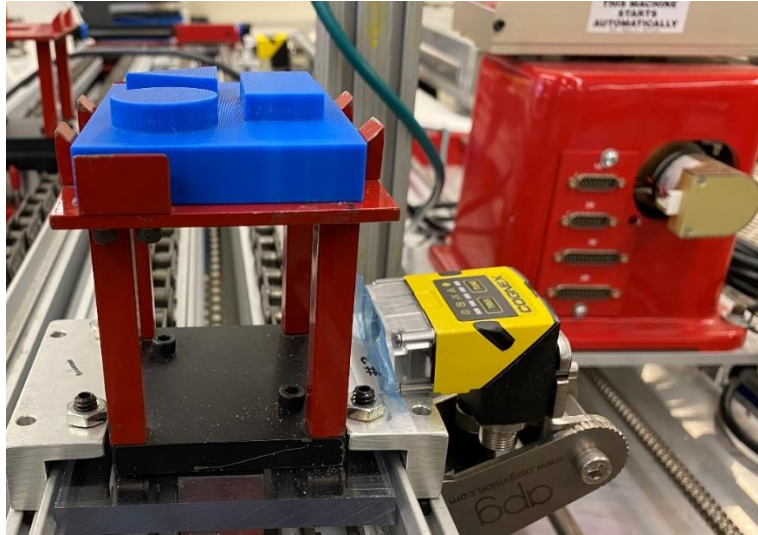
Cognex® machine vision inspection system barcode reader, along with a piece holder
